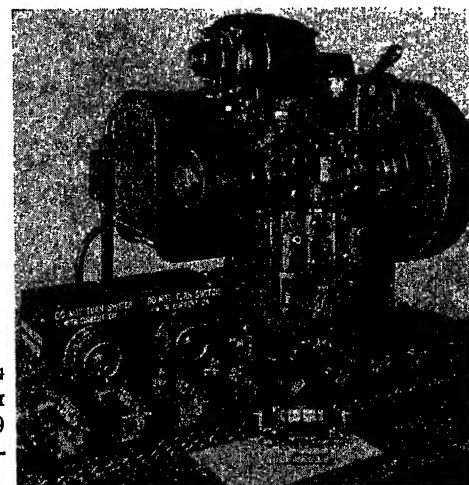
WELDING MACHINE WITH CONVEYOR FOR 109 AND 110 SWITCH-BOARD PLUGS
